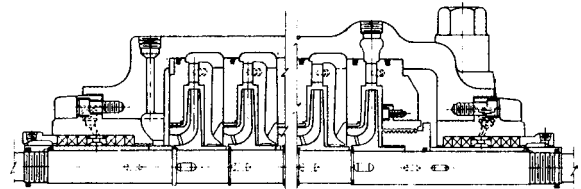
Multistage pump with axially split casing, single-suction impellers facing one direction, and hydraulic axial balancing device.
